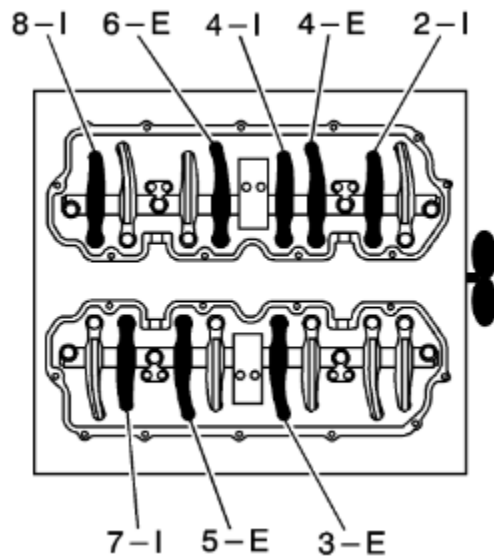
Valves adjusted with cylinder one at exhaust stroke TDC
